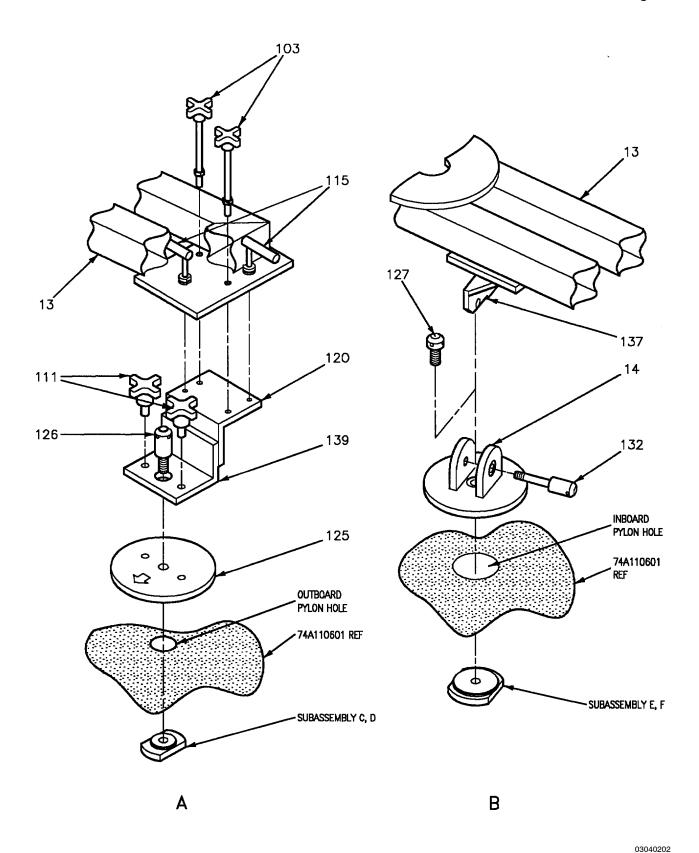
Attaching Hoisting Adapter to 74A110601 Lower Skin (Sheet 2)
